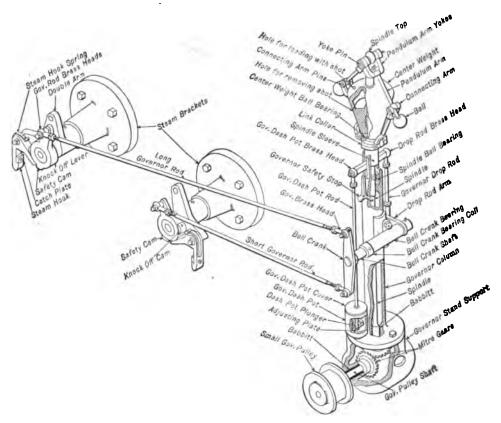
GOVERNING MECHANISM OF THE CORLISS ENGINE.
